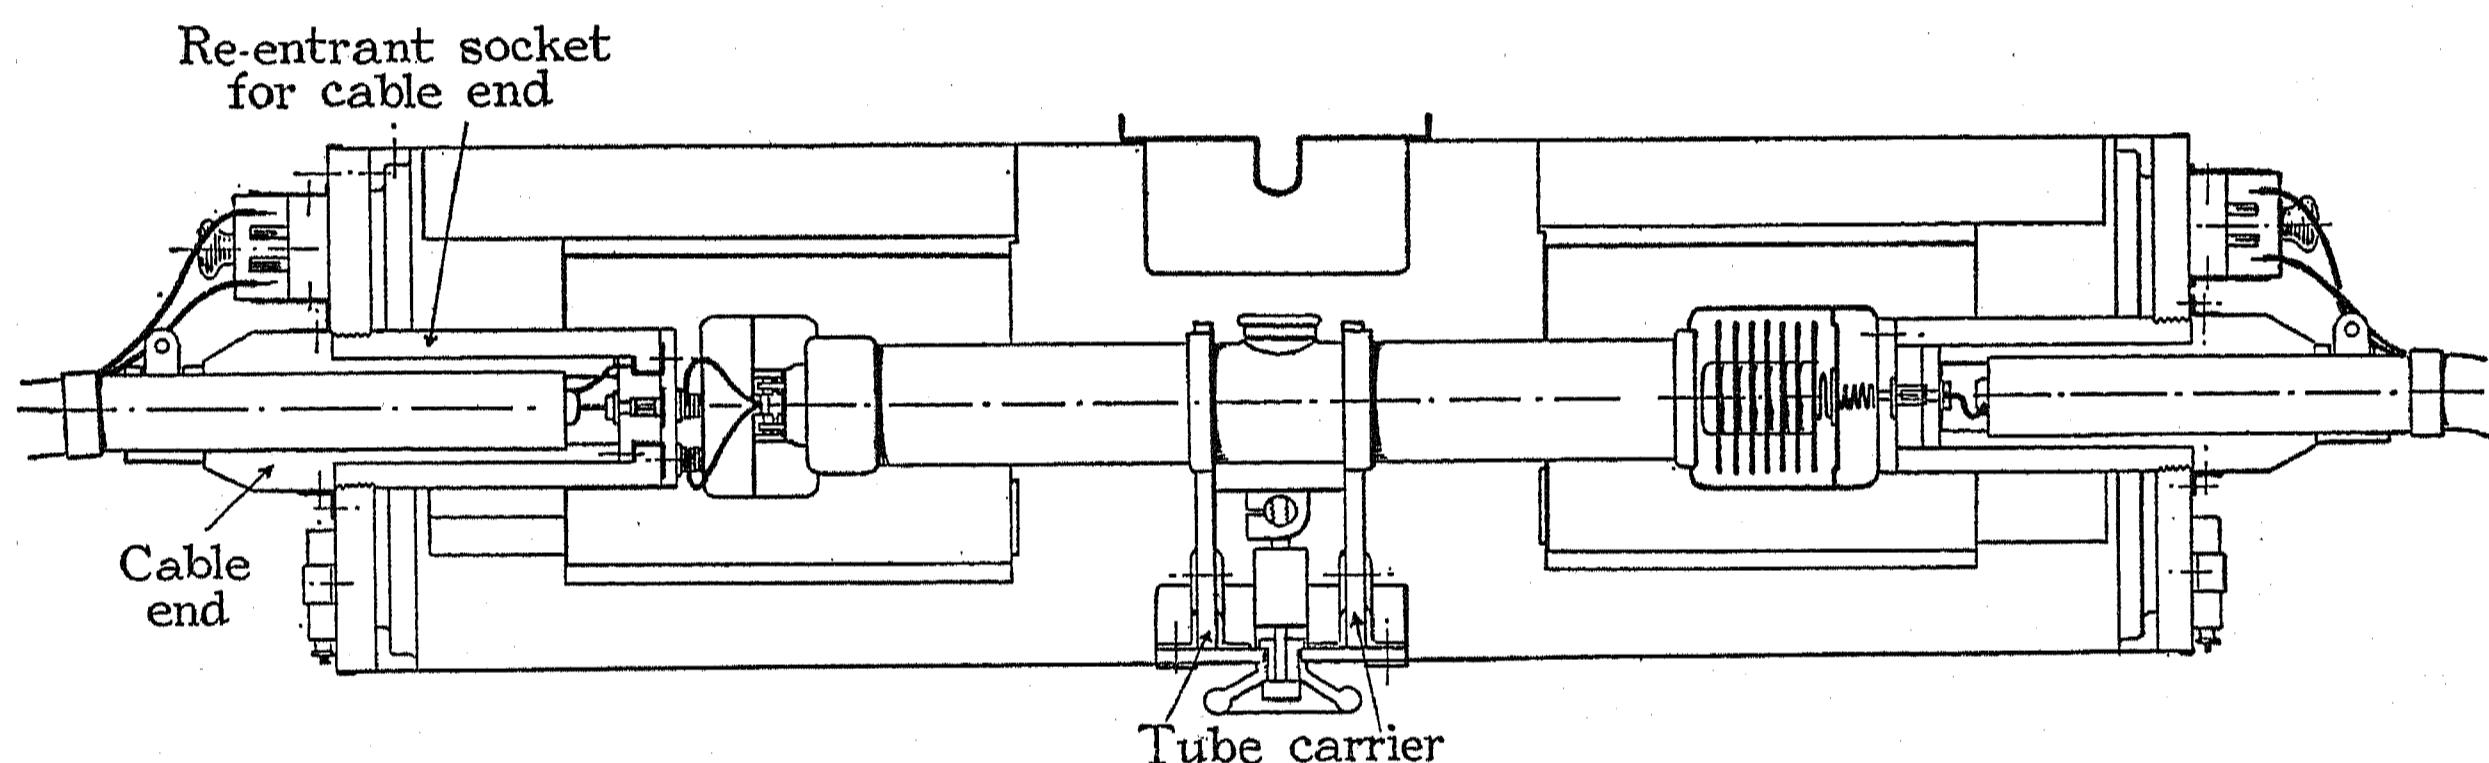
Ray-protected tube assembled in light earthed container and fitted with earth-sheathed cables.
